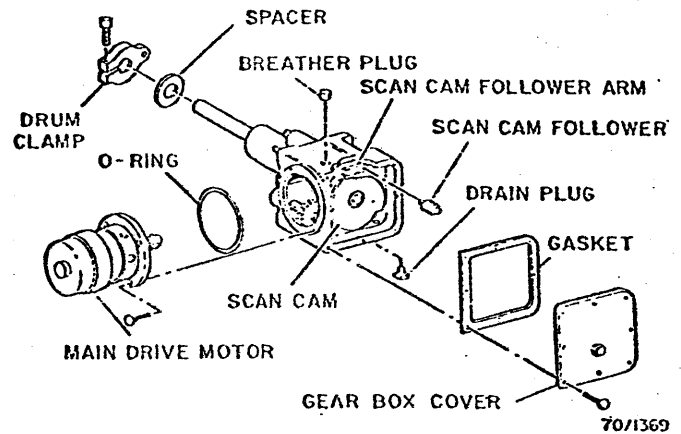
Main Drive Motor and Gear Box Assembly
